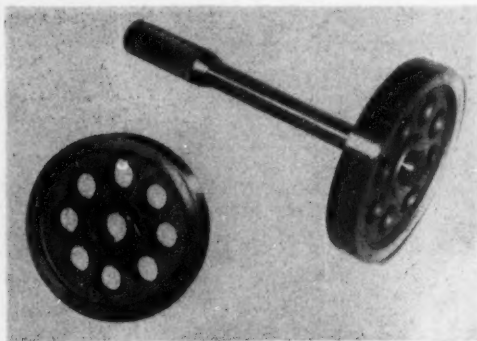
Mercer & Garside Large Screw Plug Gauges for Checking Gate-valve Bodies
